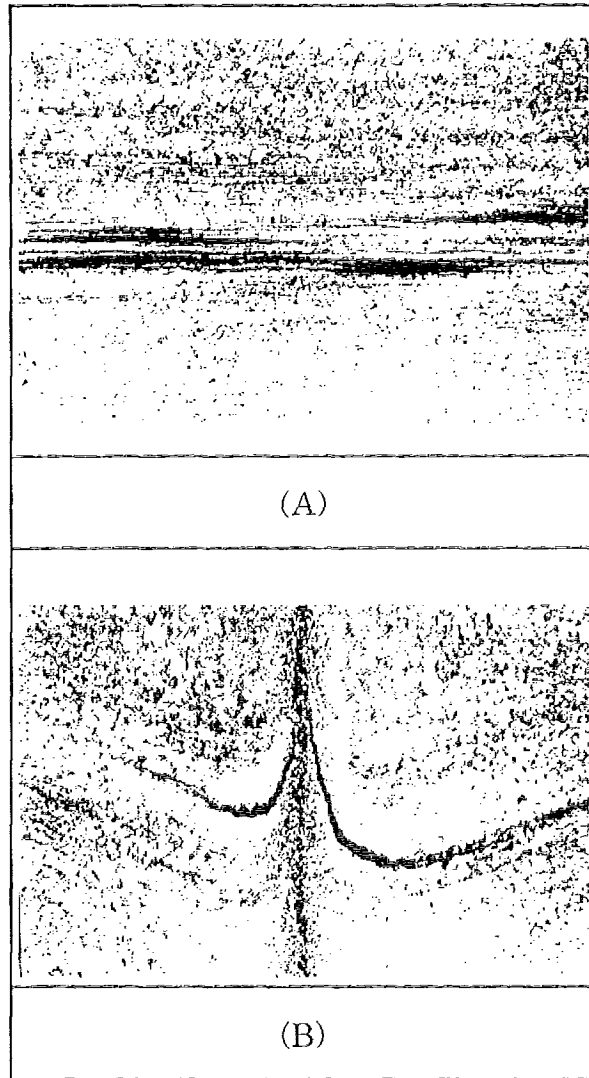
Cross sectional view of ERW carbon steel pipe showing metal flow(A) and weld segregation(B).
